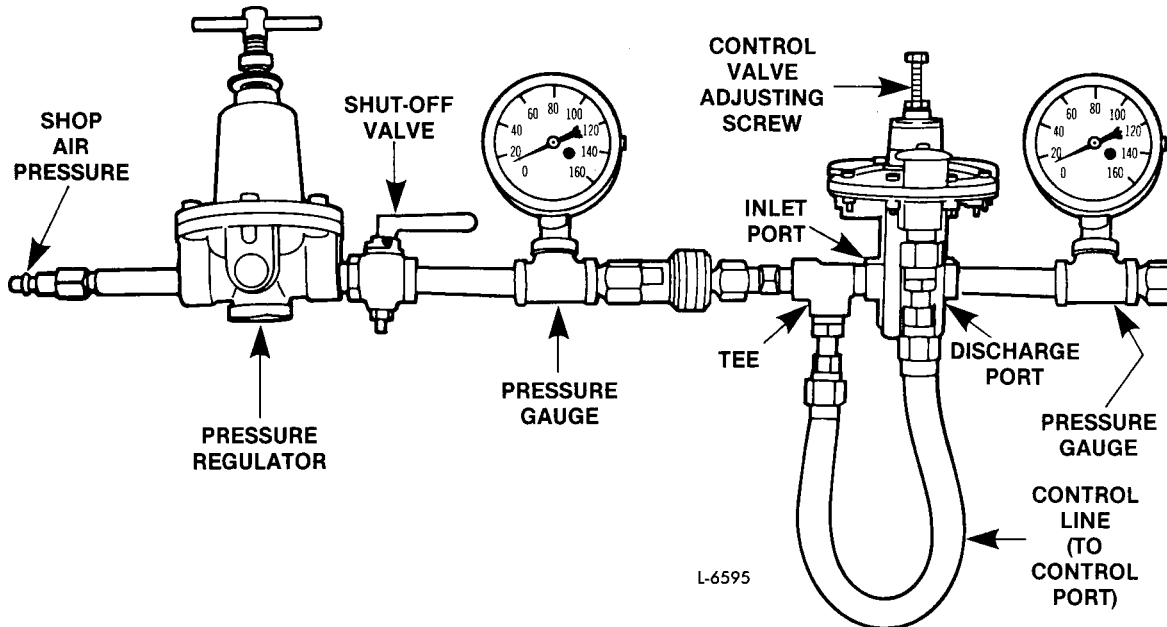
Control Valve Adjustment Set-up (Bench)
